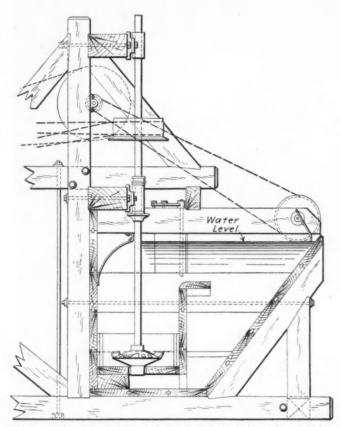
RUTH FLOTATION MACHINE-SECTIONAL VIEW
